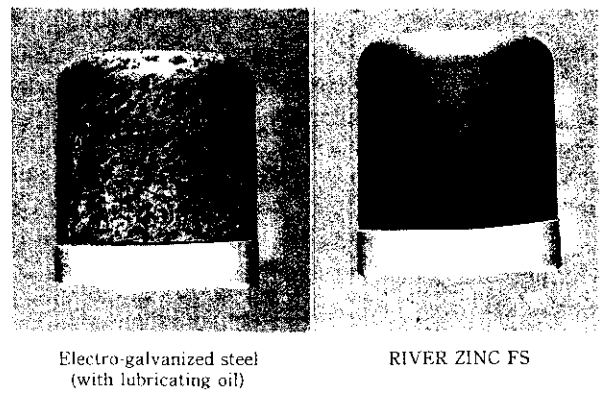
Appearance of formed parts after salt spray test (after 48 h)
